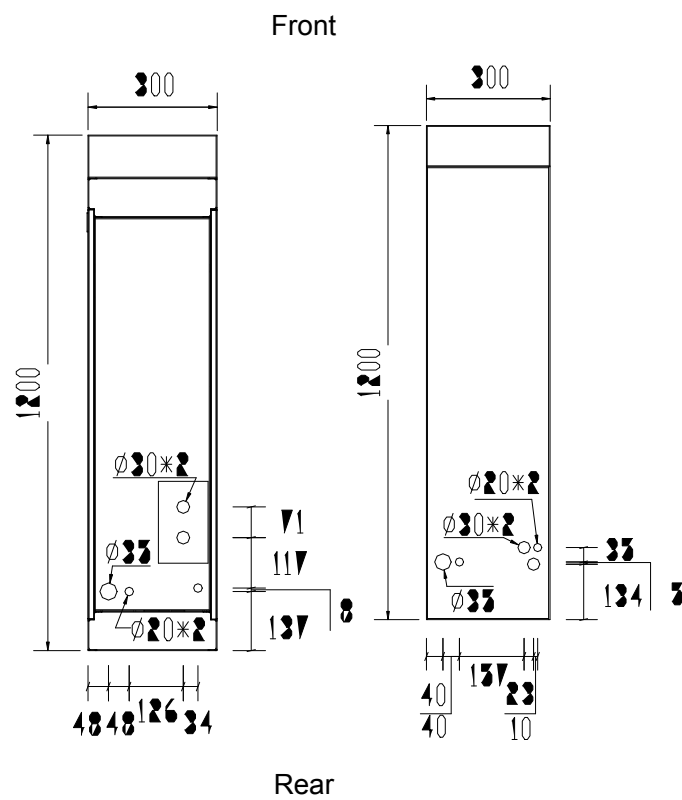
Dimensions of the Top Panel and Bottom Panel in 300mm side discharge unit (Left- Top Panel; Right- Bottom Panel)
